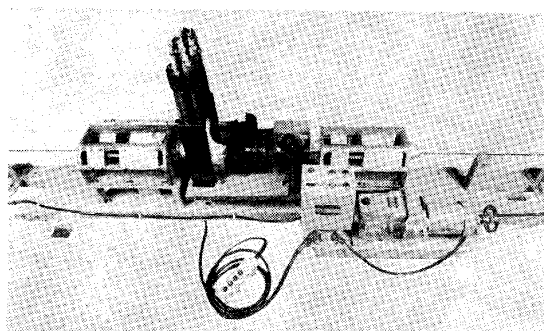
Automatic laser (circularly scanning method) testing mechanism for surface inspection.
